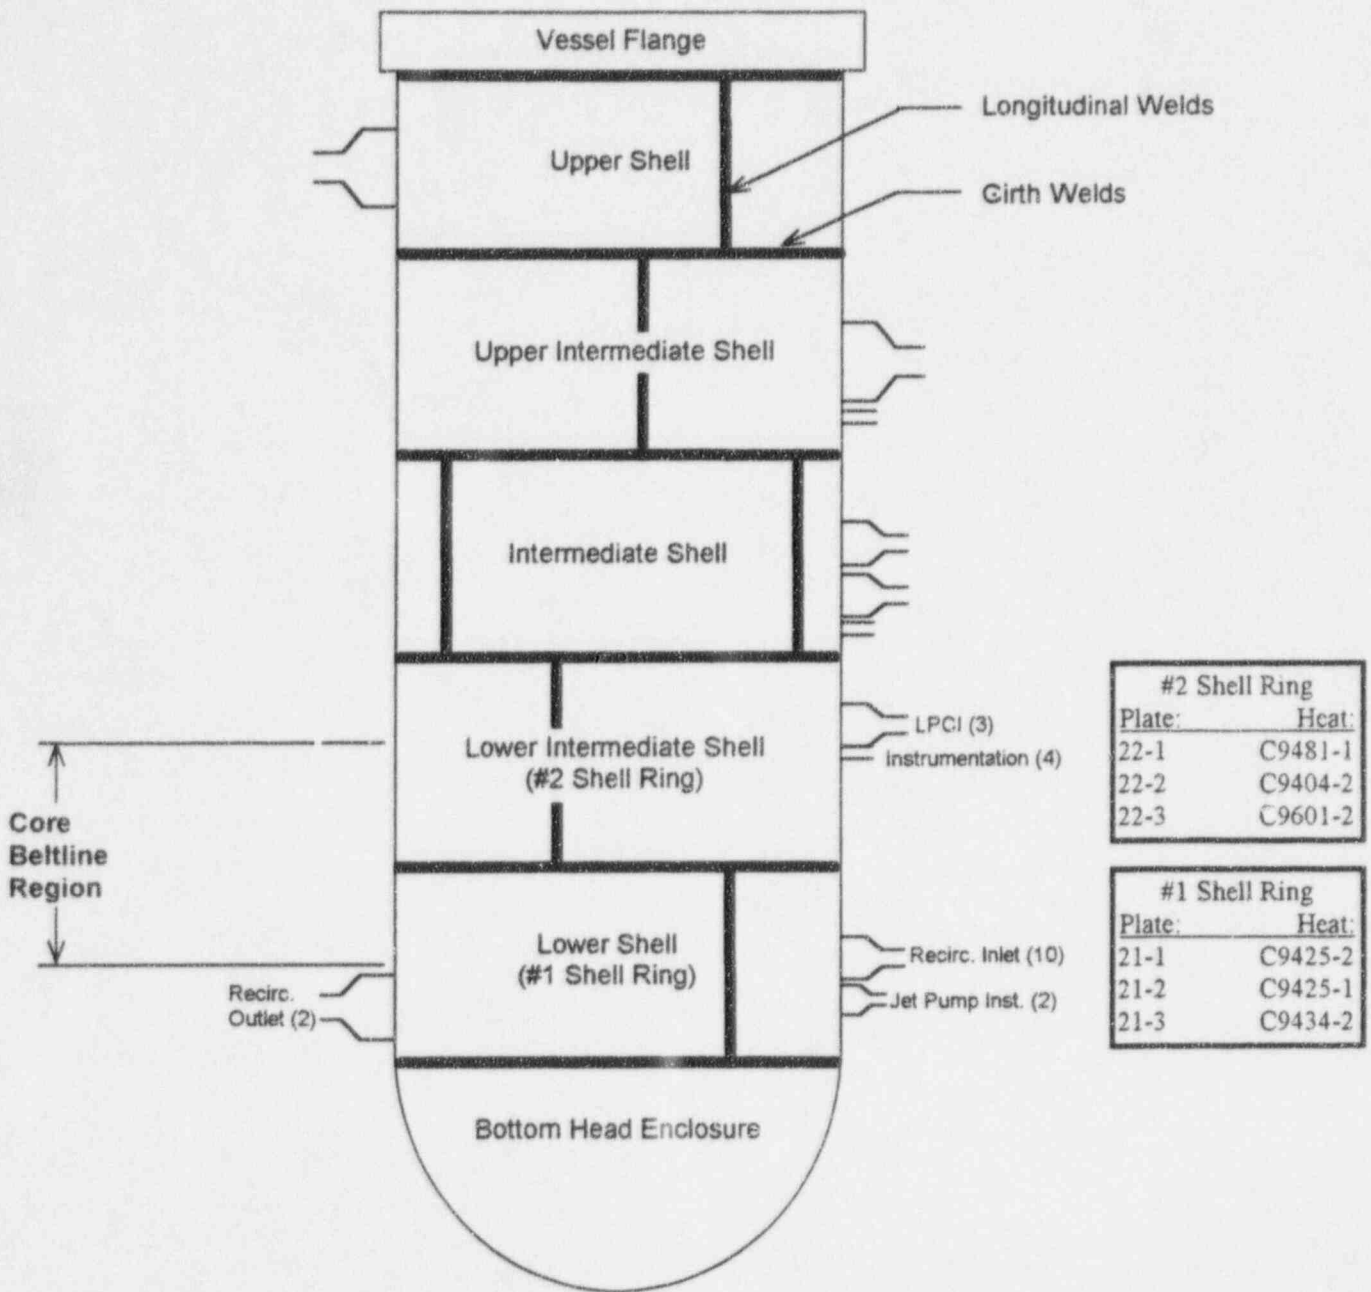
Schematic of RPV Showing Identification of Vessel Beltline Plates and Welds
